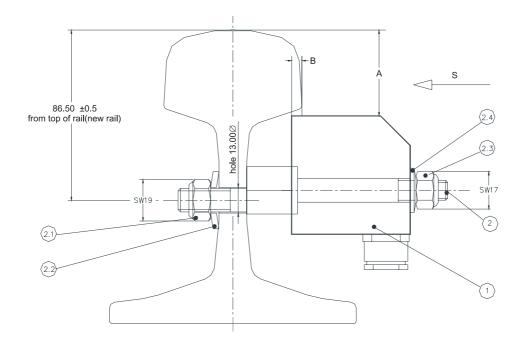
Web of rail mounting of wheel sensor type RSR180
